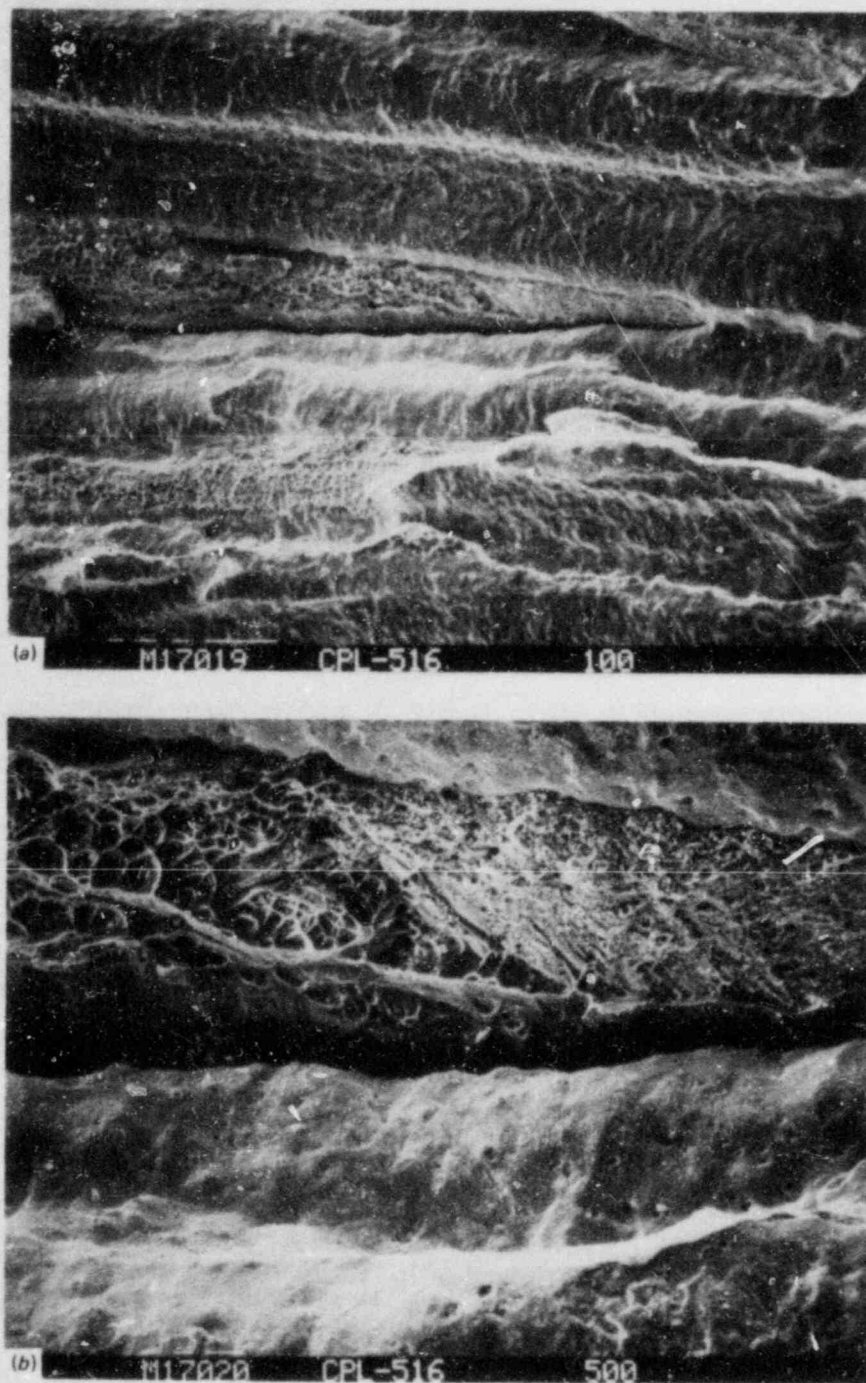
Detailed views of type 309 weld metal fracture surface of specimen CPL-516 showing predominantly flat fracture with islands of fibrous tearing. (a) 100 $\times$  and (b) 500 $\times$ .
